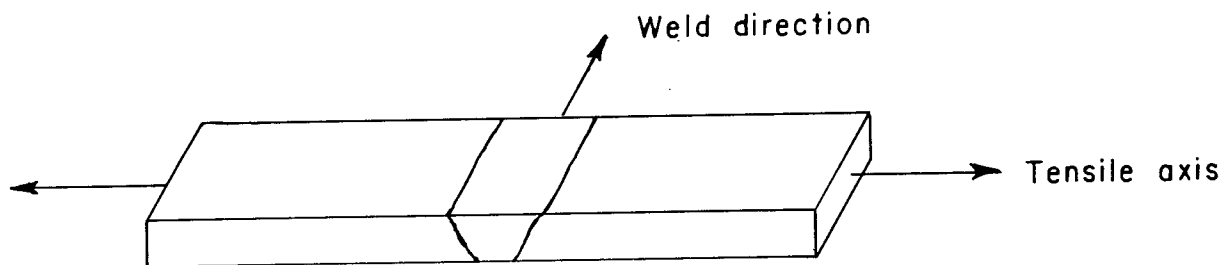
SCHEMATIC REPRESENTATION OF TRANSVERSE WELD TENSION SPECIMEN
